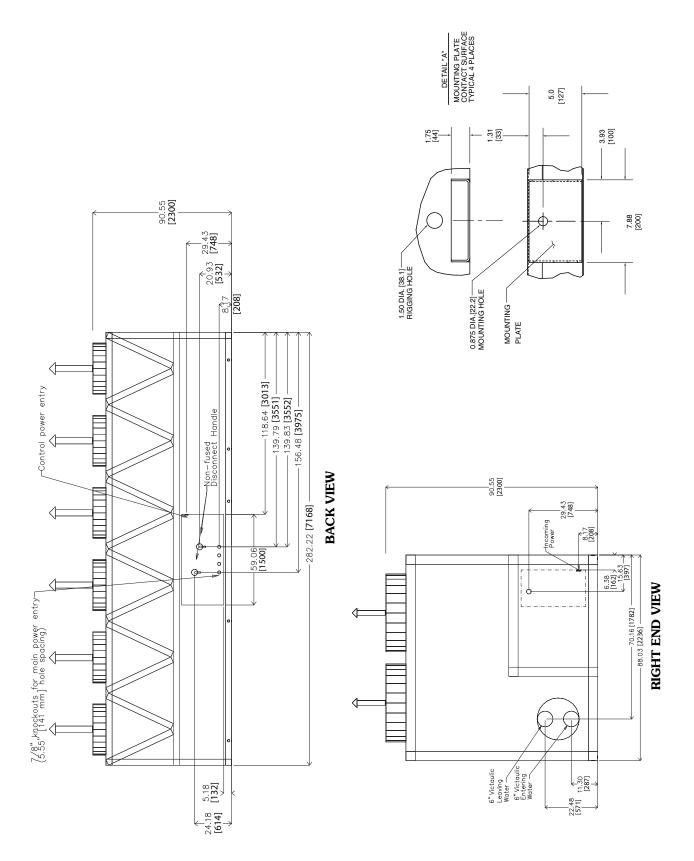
30XA180,200 Air-Cooled Liquid Chiller Dimensions (cont)
